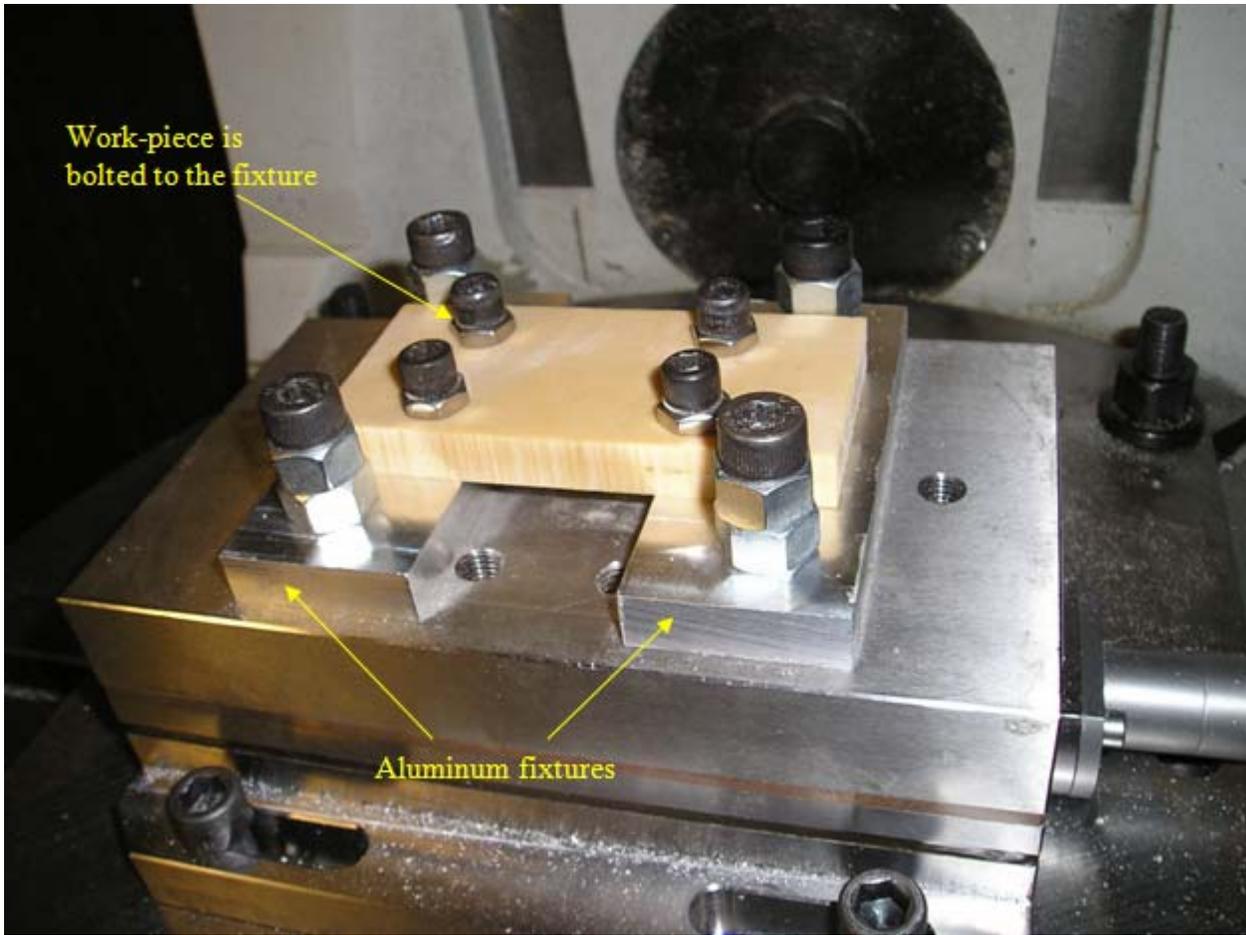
Setup showing work-piece bolted to aluminum fixture.
